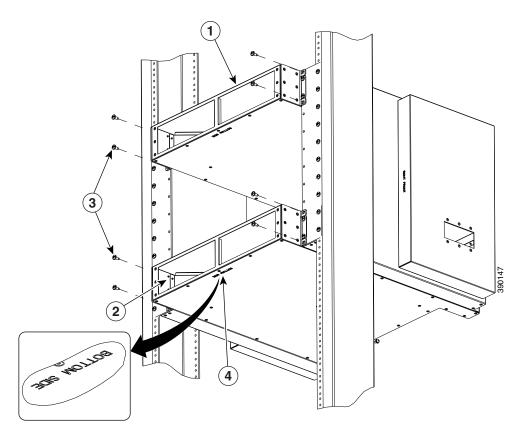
Installing the Air Baffles on the Cisco ASR 9904 Router Chassis
